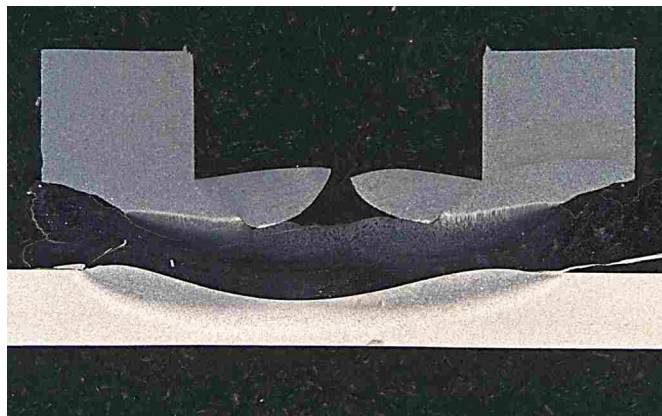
Bit with No Cutting Geometry or Chip Wells, Welded without Aluminum
